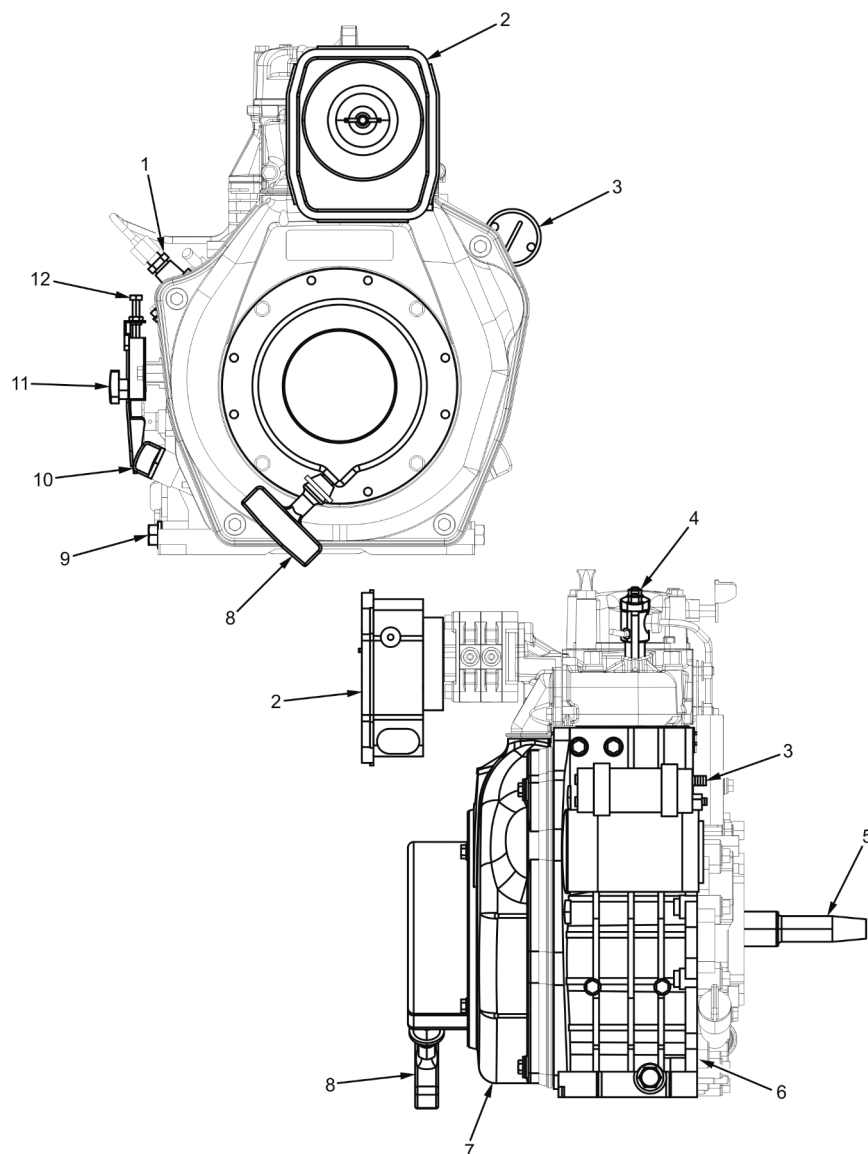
Location Of Engine Assembly Components Model L70N6EZ0T9EAFD.
